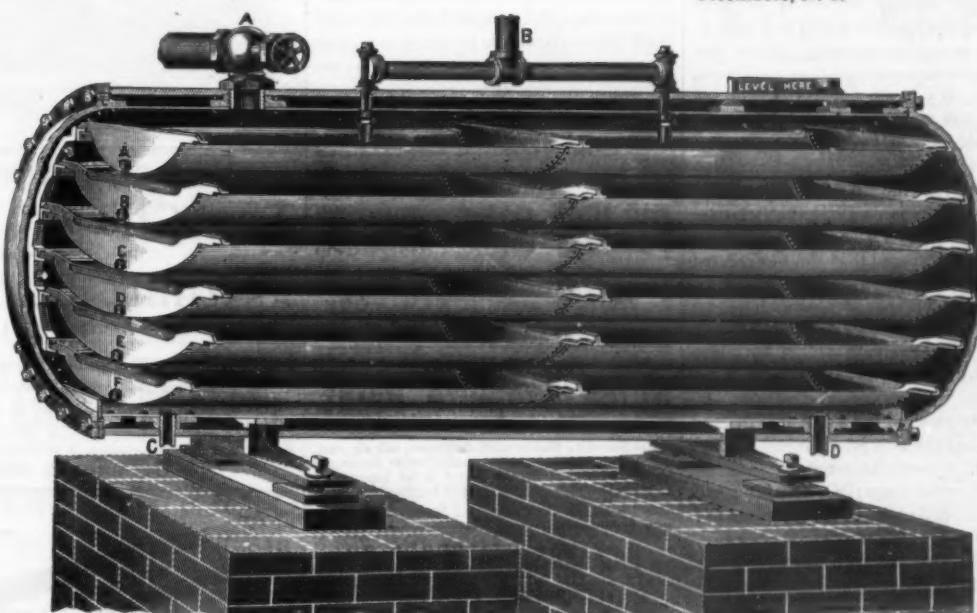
SECTIONAL VIEW OF THE HOPPES FEED-WATER PURIFIER.
